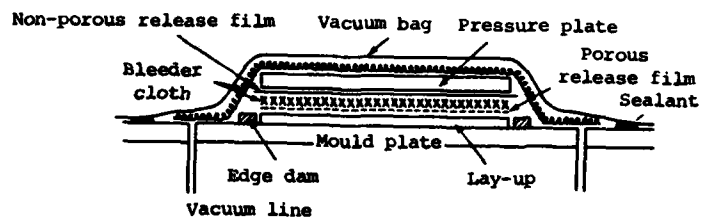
TYPICAL BAG ASSEMBLY FOR FLAT PANEL MOULDING.
